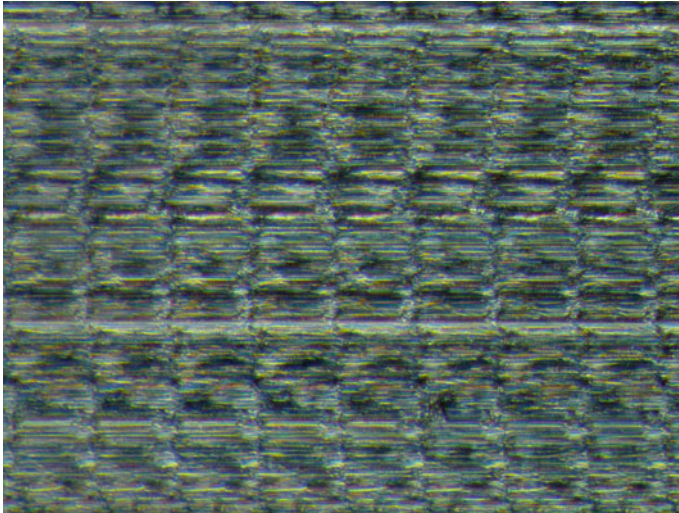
Surface form of an IPB wheel tooth flank in the tooth form cross-section (figure sampled by  $1\ \mu\text{m}$  pitch, with no filtering)
